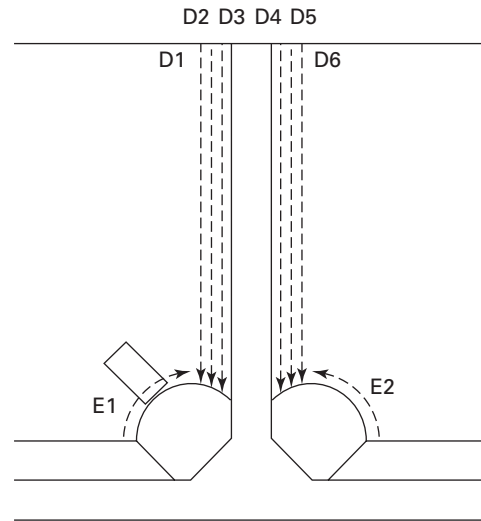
SCANS OF VERTICAL CUT OUT WELD AND CUT OUT SURFACE
